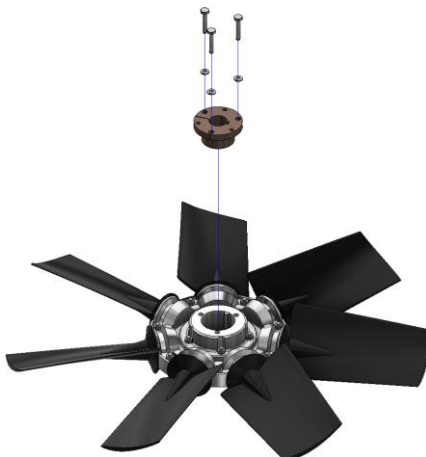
Exploded View Showing Bushing Installation Into Fan Blade Assembly
